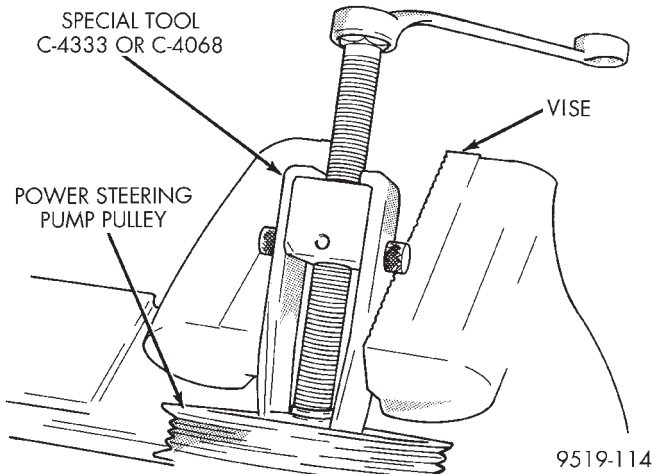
Removing Pulley From Power Steering Pump Shaft
